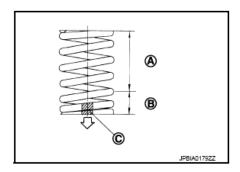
Identifying Cylinder Head Side Wide Pitch And Narrow Pitch
